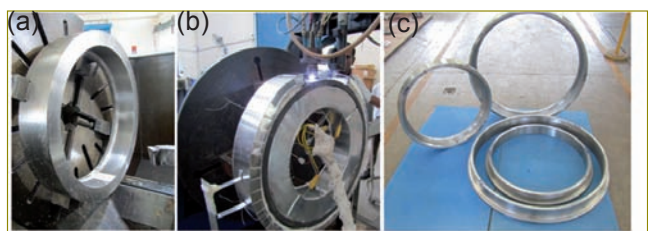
(a) Pre machining, (b) Hard facing on PTA with electrical resistance heating enclosure and (c) Machined wear rings
